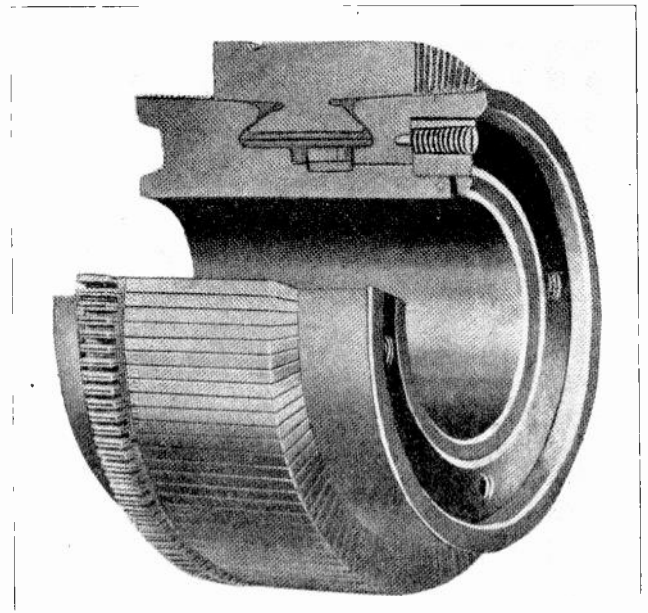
The above photo shows an excellent sectional view of a commutator for a D. C. machine.
